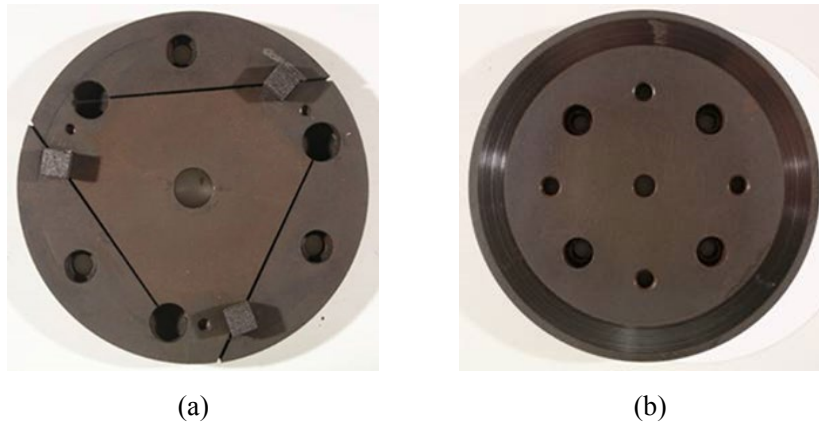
B.6. (a) Brake pad holder and (b) tested subscale brake rotor. Source: PNNL.
